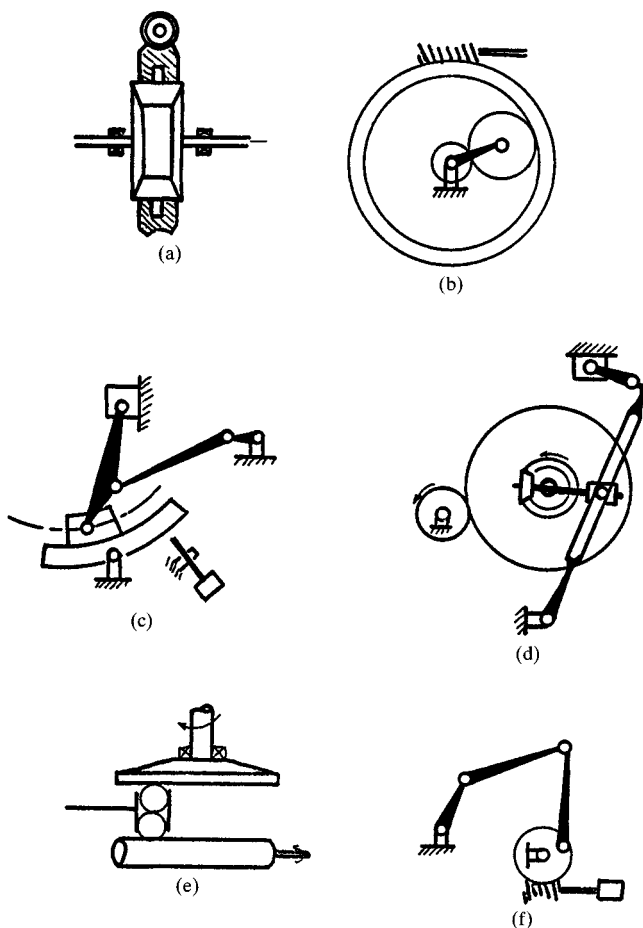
Fine adjustments II. Fine adjustments for moving mechanisms are adjusting devices which control the motion of linkages such as stroke, etc., while the mechanism is in motion. (a), (b) Differential gear adjustment; (c) adjustable-stroke engine; (d) adjustable stroke of shaper mechanism; (e) ball and disk speed changer; (f) adjusting fixed center of linkage for changing motion properties.
